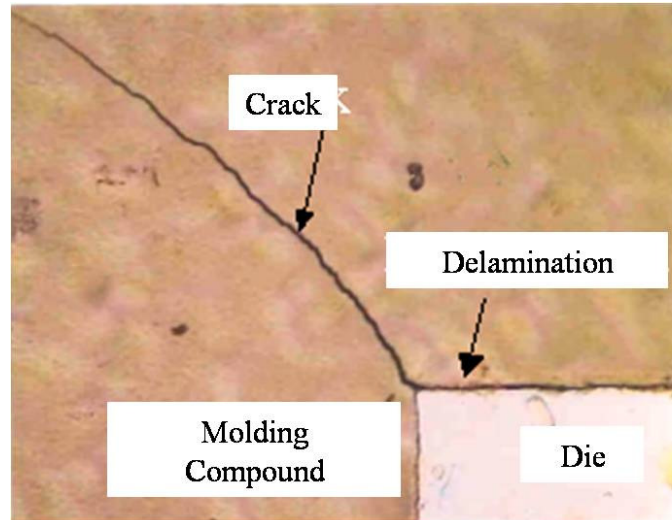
Package cracking (molding compound cracking) [Yang, 2007]
